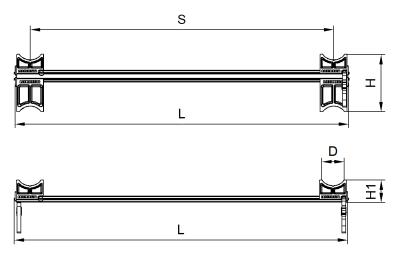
Dimensions - stacking device 2200 mm (7.22 ft)
